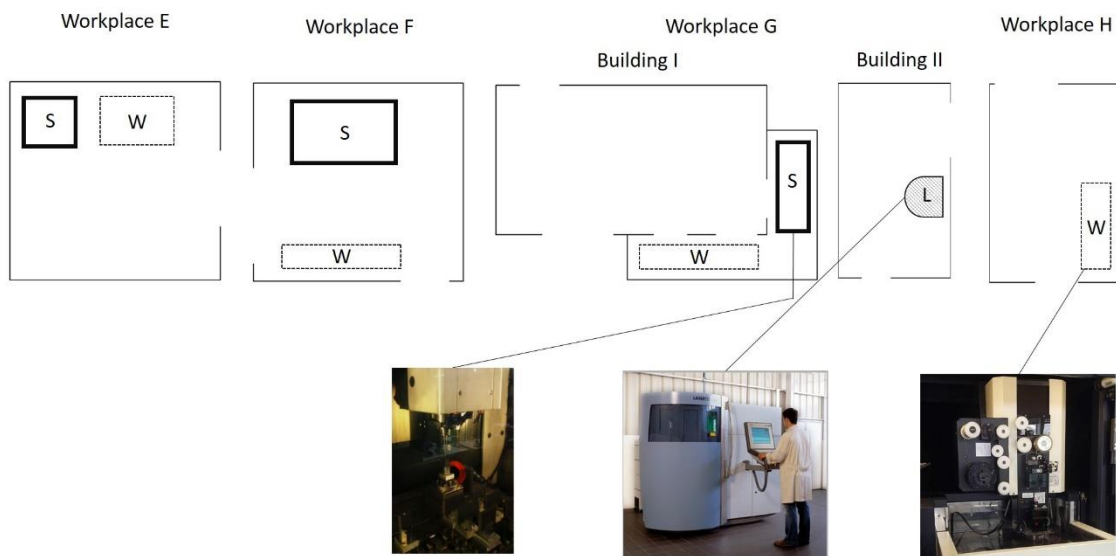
2 - Schematic illustration of workplaces of subtractive manufacturing (S – sinker EDM, W – wire EDM and L – laser machining).
